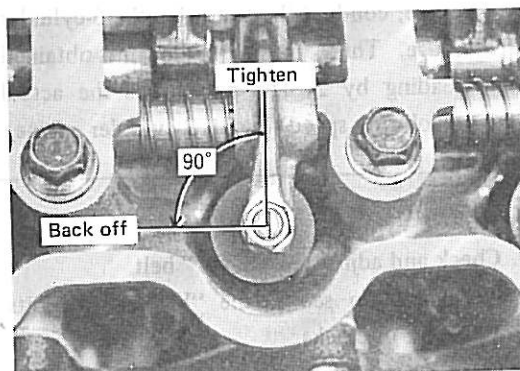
Adjusting Valve Clearances (Reference Information)
